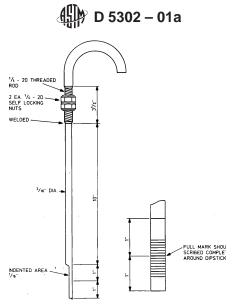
Typical Adjustable Dipstick Fabrication
